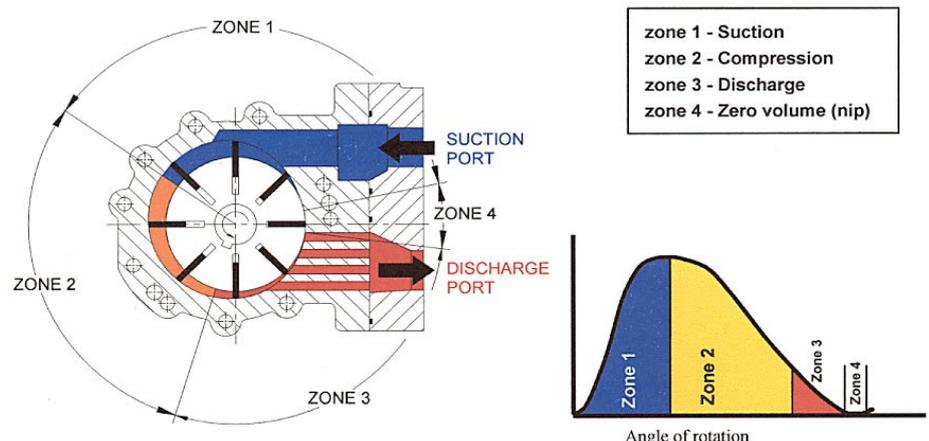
Rotovane[®] rotating blade compressor, MCC Canada
